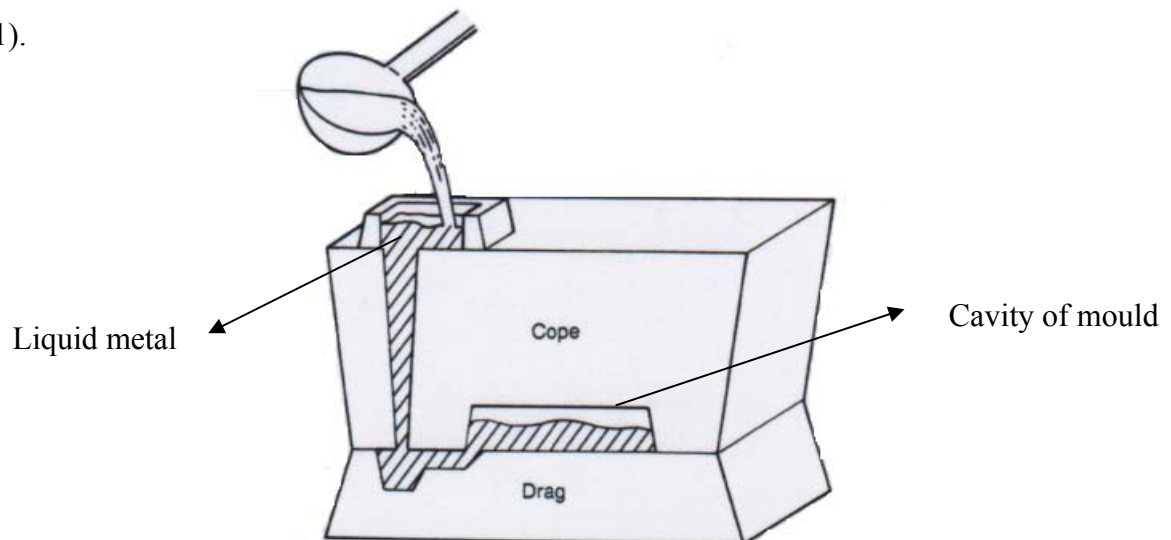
gravity top pouring of metal into a mould: the mould is partially sectioned to show the liquid metal flow [1]
